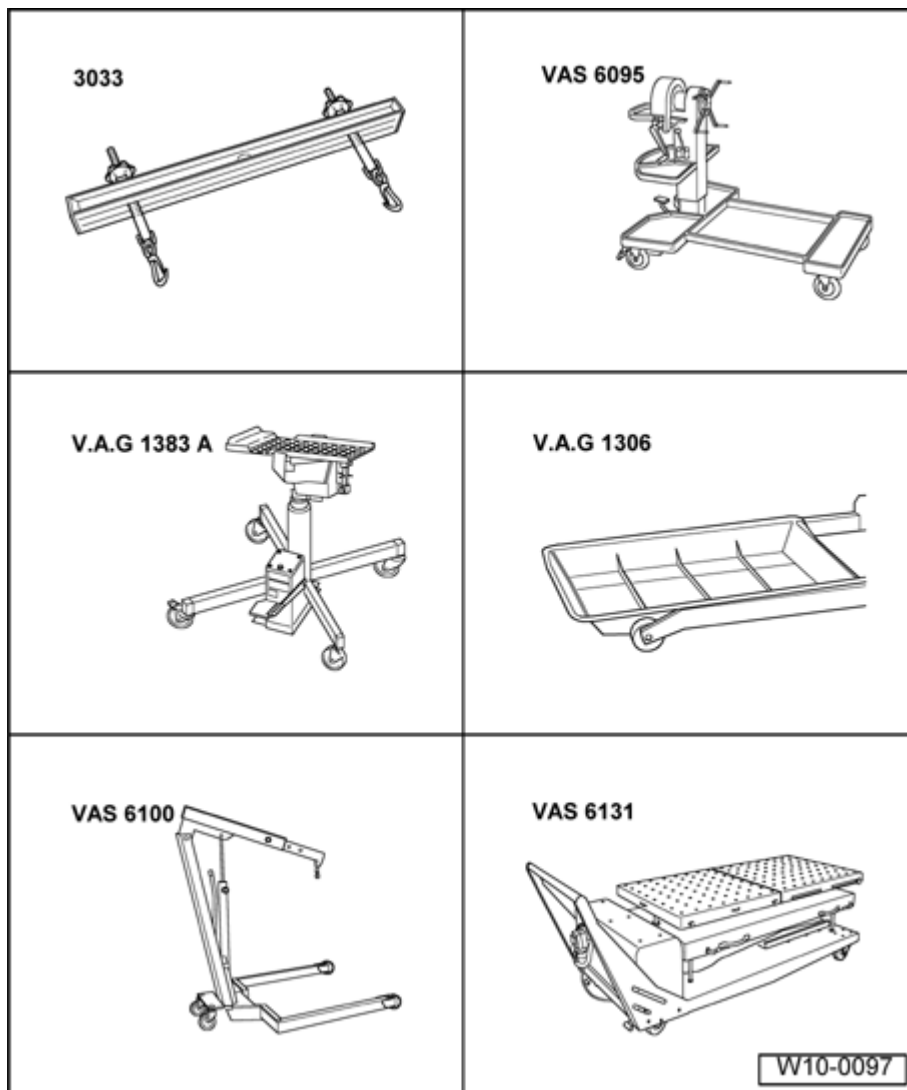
Identifying Special Tools - Engine, Removing And Installing
